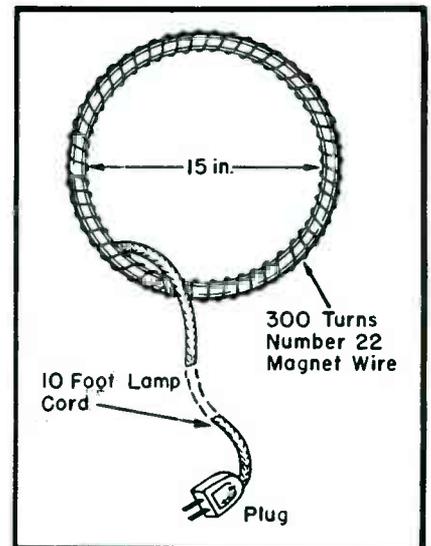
DEGAUSSING coil. Completed winding is covered with plastic tape.
